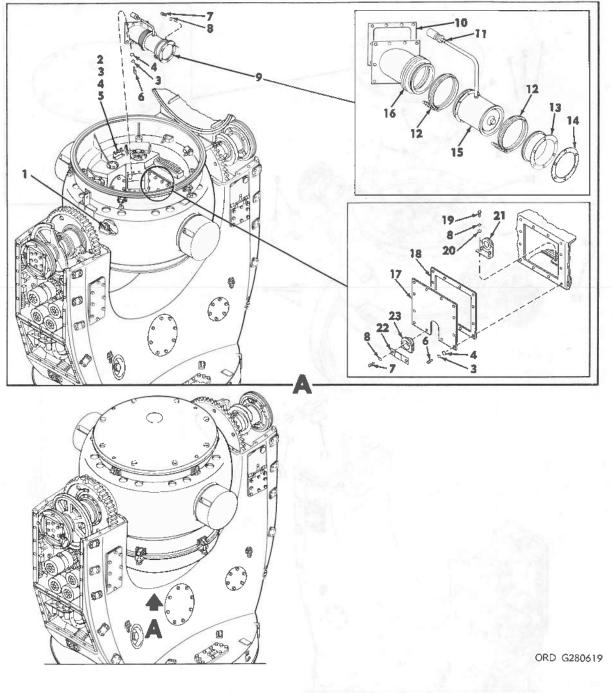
PEDESTAL, ANTENNA /8171625/-PARTIAL EXPLODED VIEW
